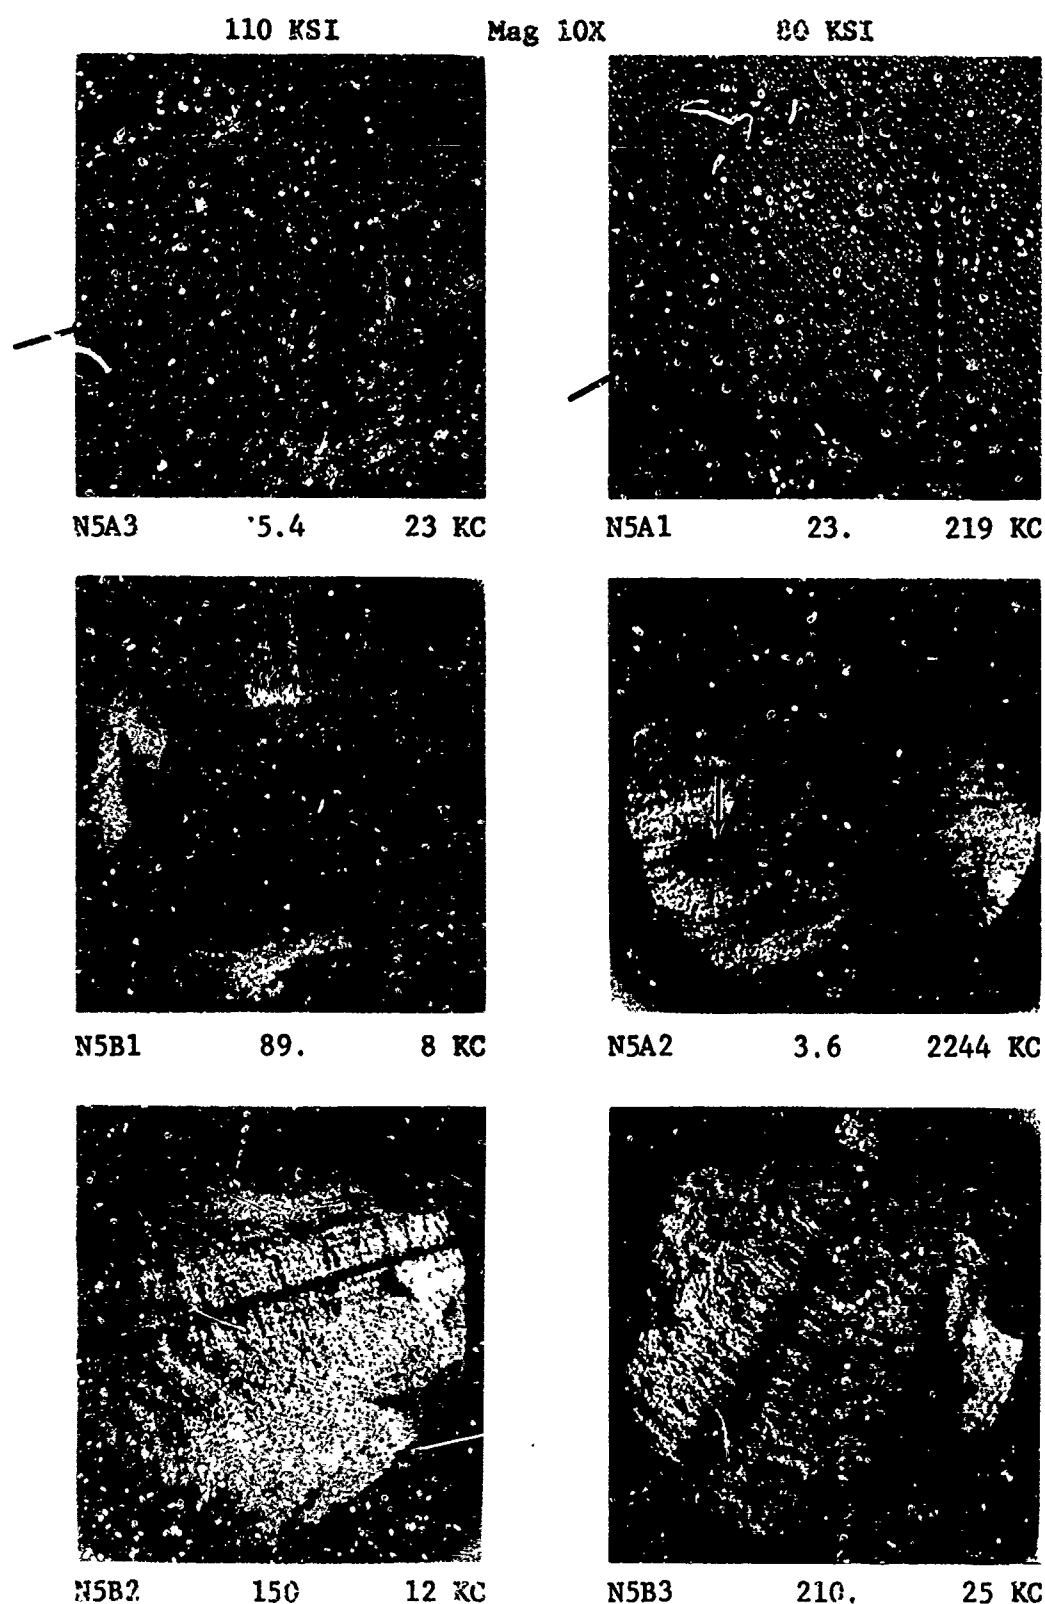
Fracture Surfaces of Failed Fatigue Specimen Series N5-Double-Bond/Two-Axis Diffusion Bonded with "Less than Optimum" Deformation
